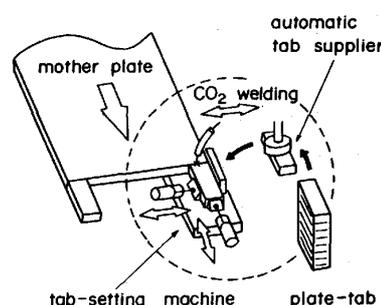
Schematic view of Automatic Plate-tab Welder
